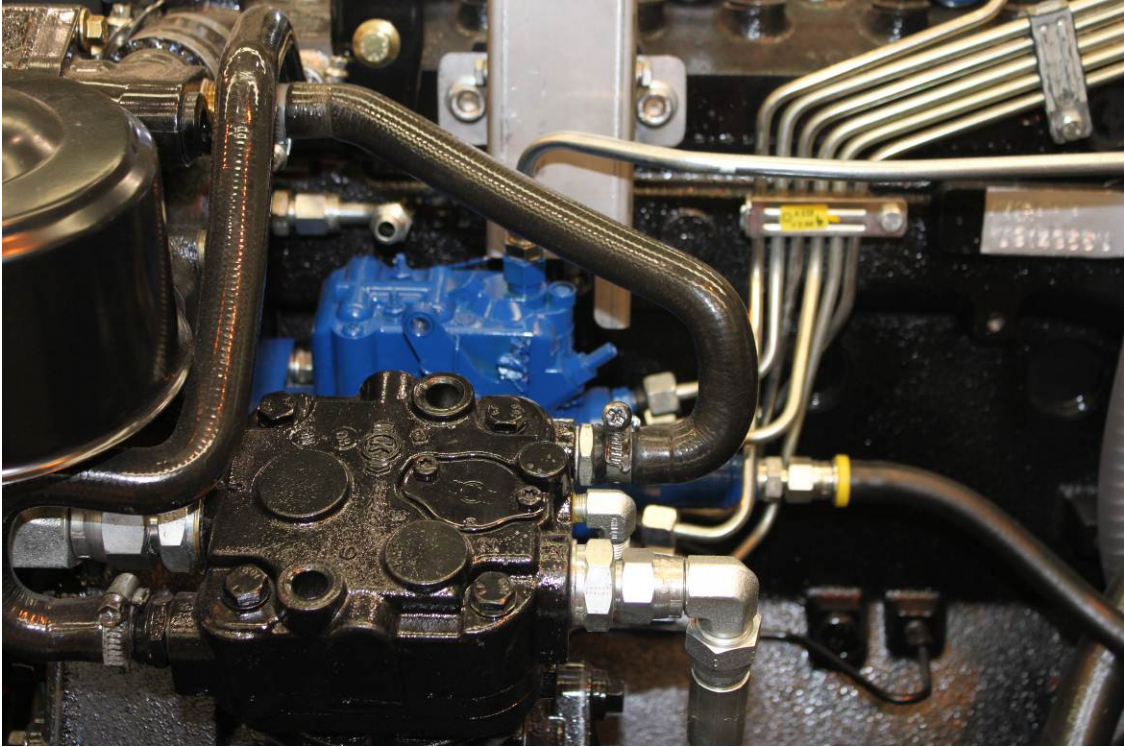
Compressor coolant hose reconnection after removal of coolant loss valve.
